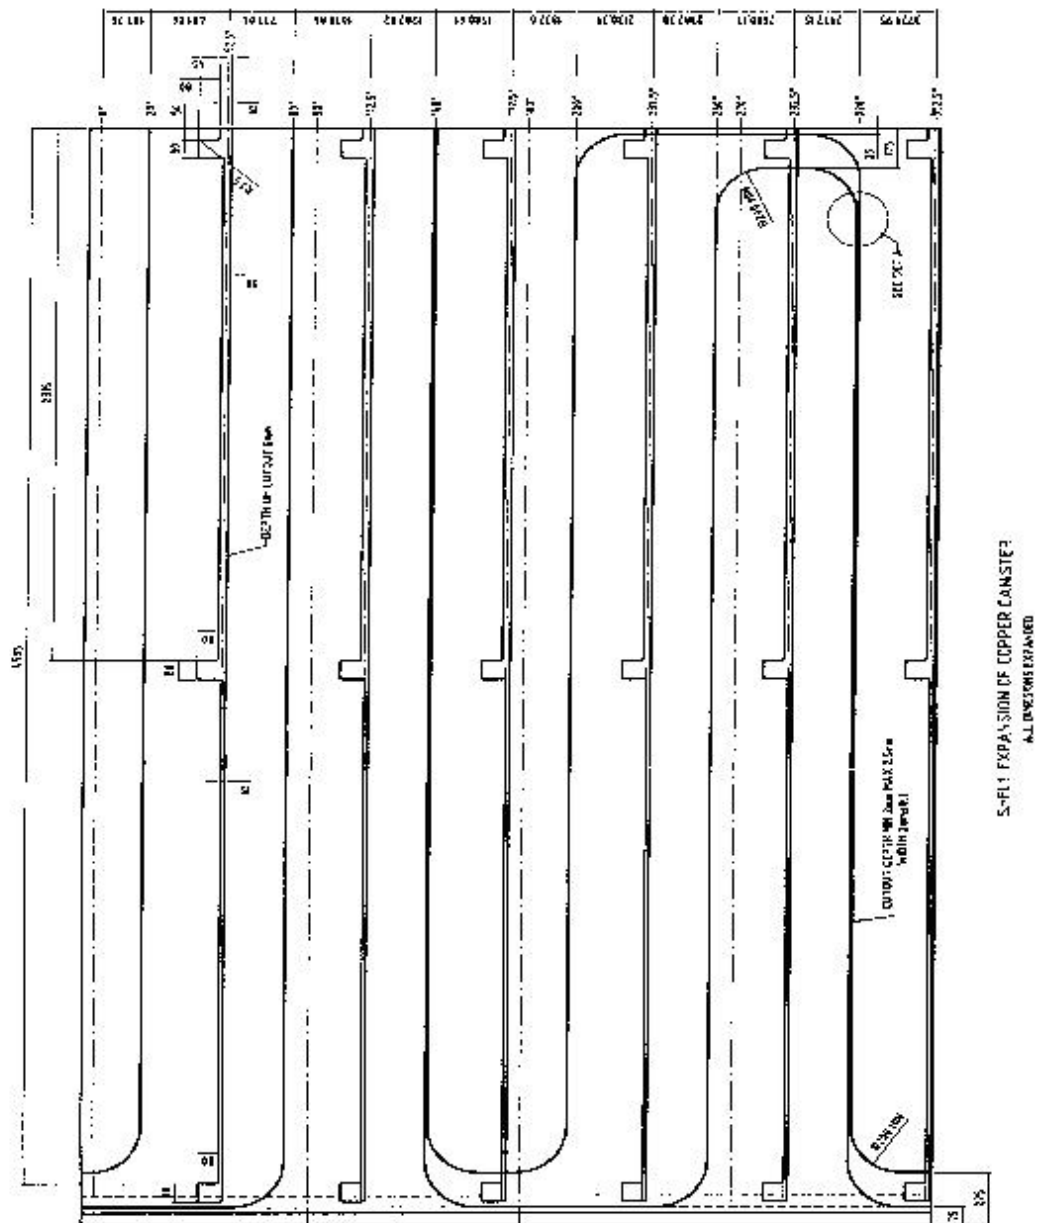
Laying of two fibre optic cables with protective tube of Inconel 625 (outer diameter 2 mm) for measurement of the canister surface temperature (surface unfolded).
